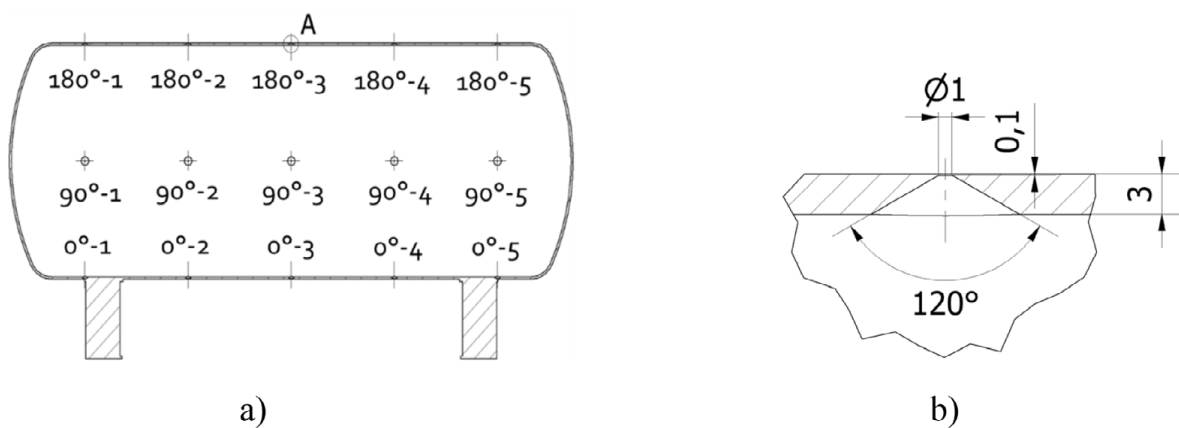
Pitting introduced in a FE model of pressure vessel: (a) pitting holes locations (angle and number); (b) detail A - pitting hole geometry (all dimension in mm).
